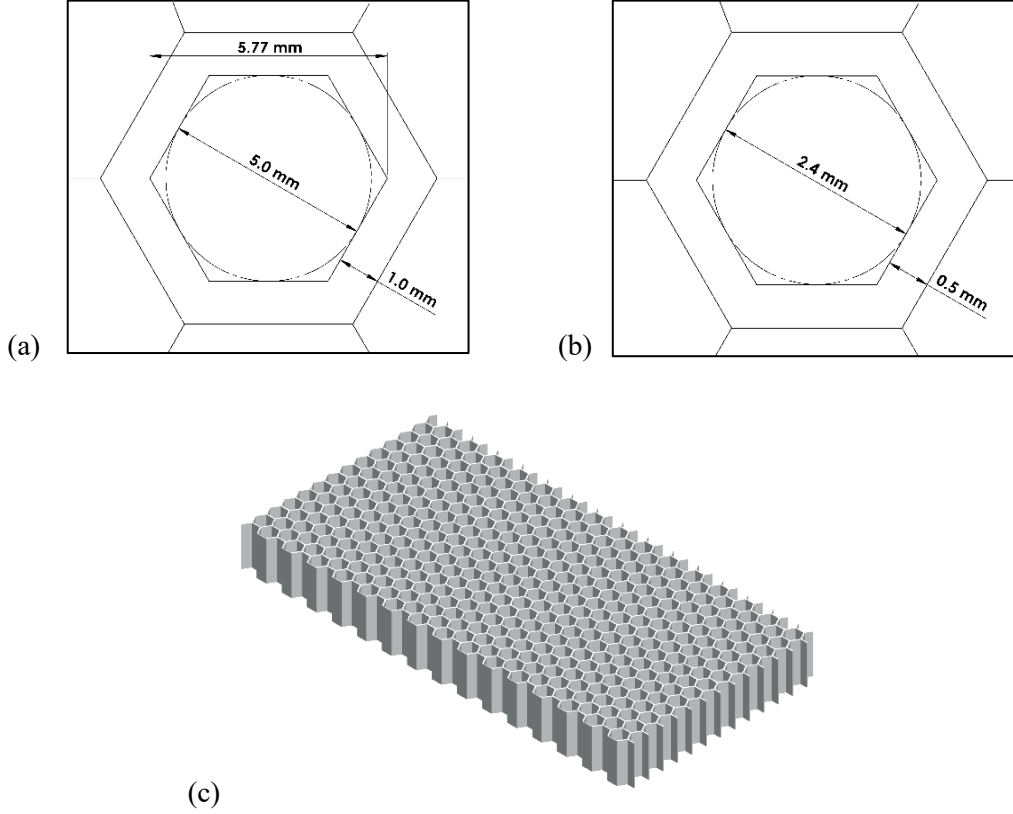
Dimensions of the (a) large and (b) small honeycomb structures unit cell (c) a three-dimensional CAD model
